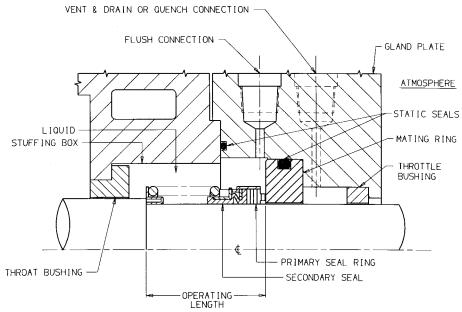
Single Seal—Inside Mounted Classification Type A Grade 1
